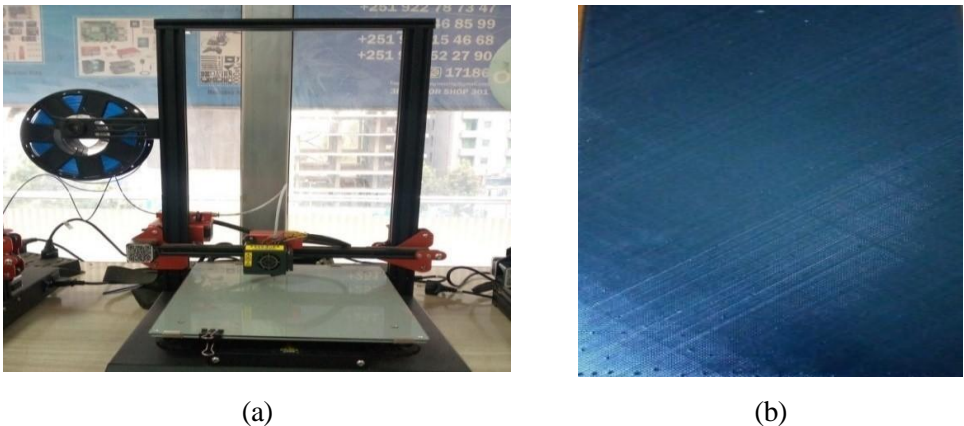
(a) 3D printing machine and printed PLA layer (b) 3D printed PLA layer
